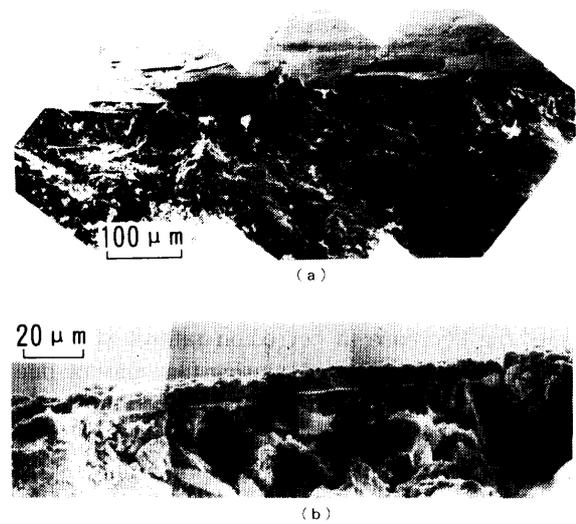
Typical examples of fracture surface for (a) PVD coated specimen and (b) CVD coated specimen tested under corrosion fatigue
